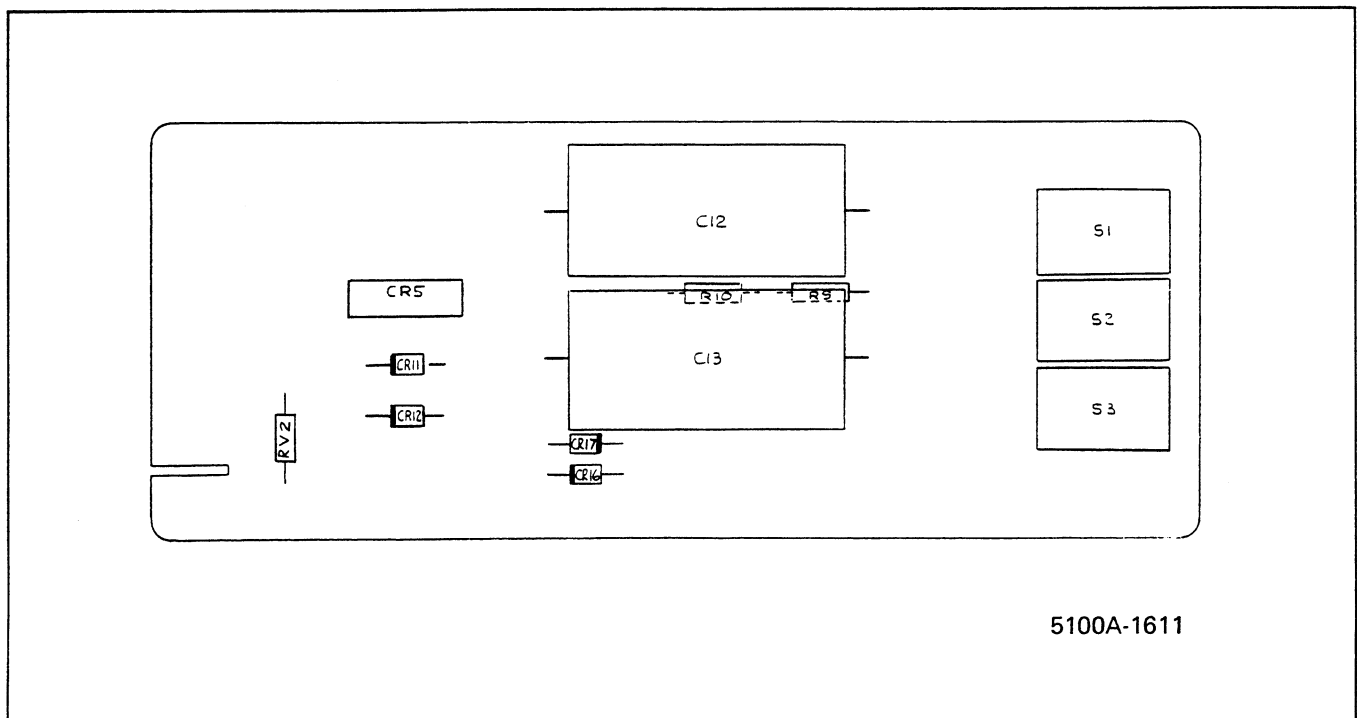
A7A1 Forward Transformer Terminal PCB Assembly
